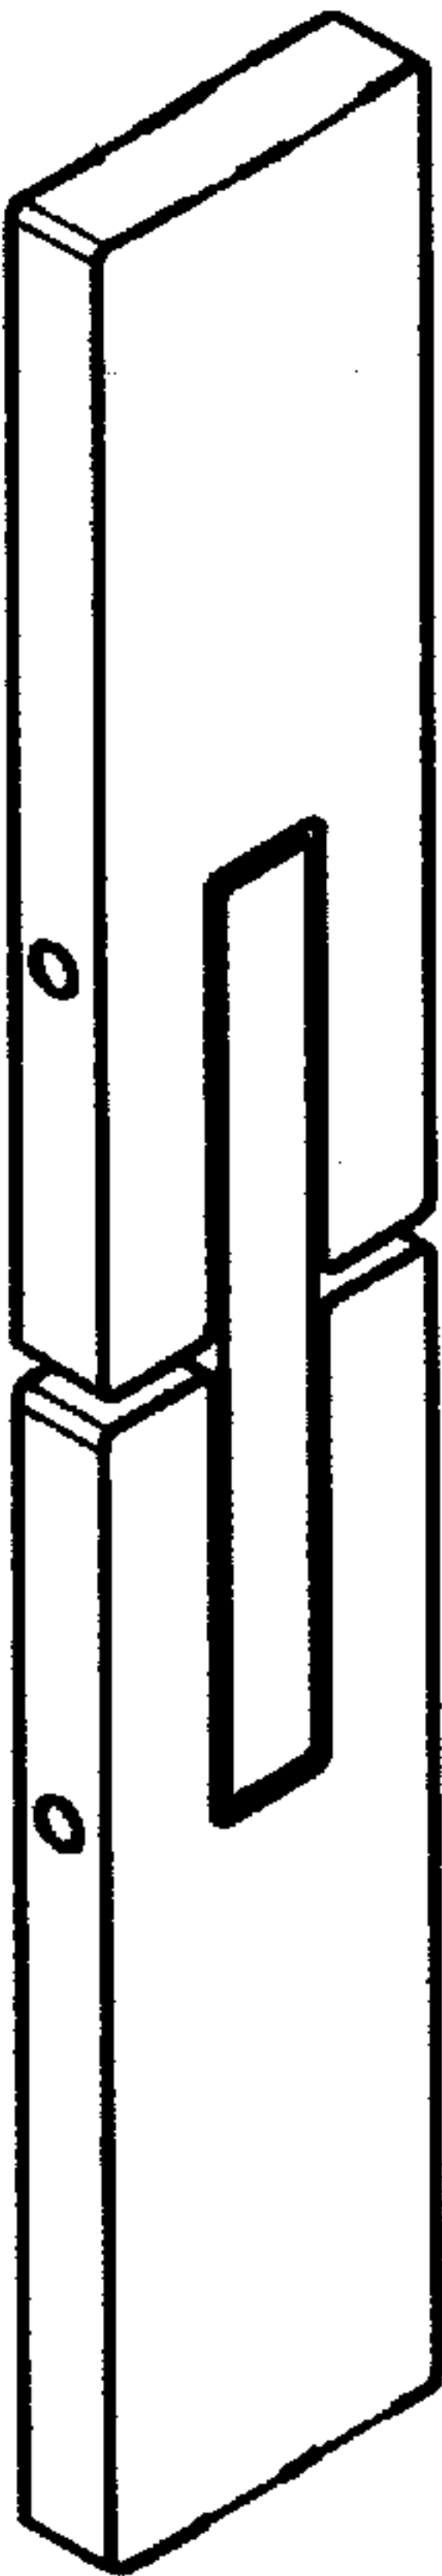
shows a front view of the alternate embodiment, with the rear view being identical;
